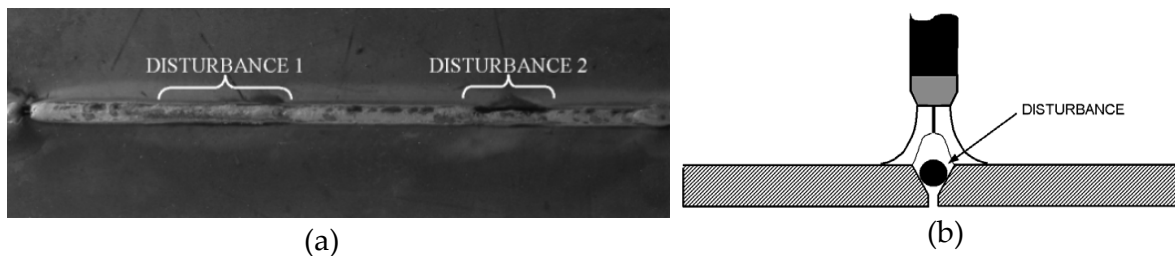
(a) welding joint with marked areas of disturbances of the welding process, (b) scheme of disturbance of the welding process
